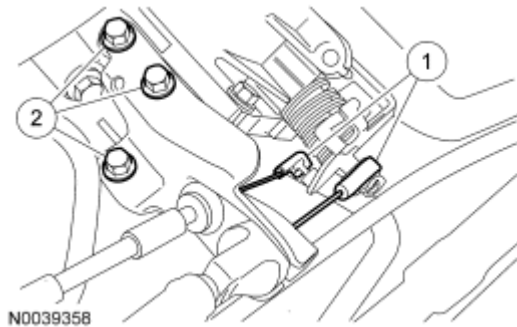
Identifying Accelerator & Speed Control Cable And Bolts
